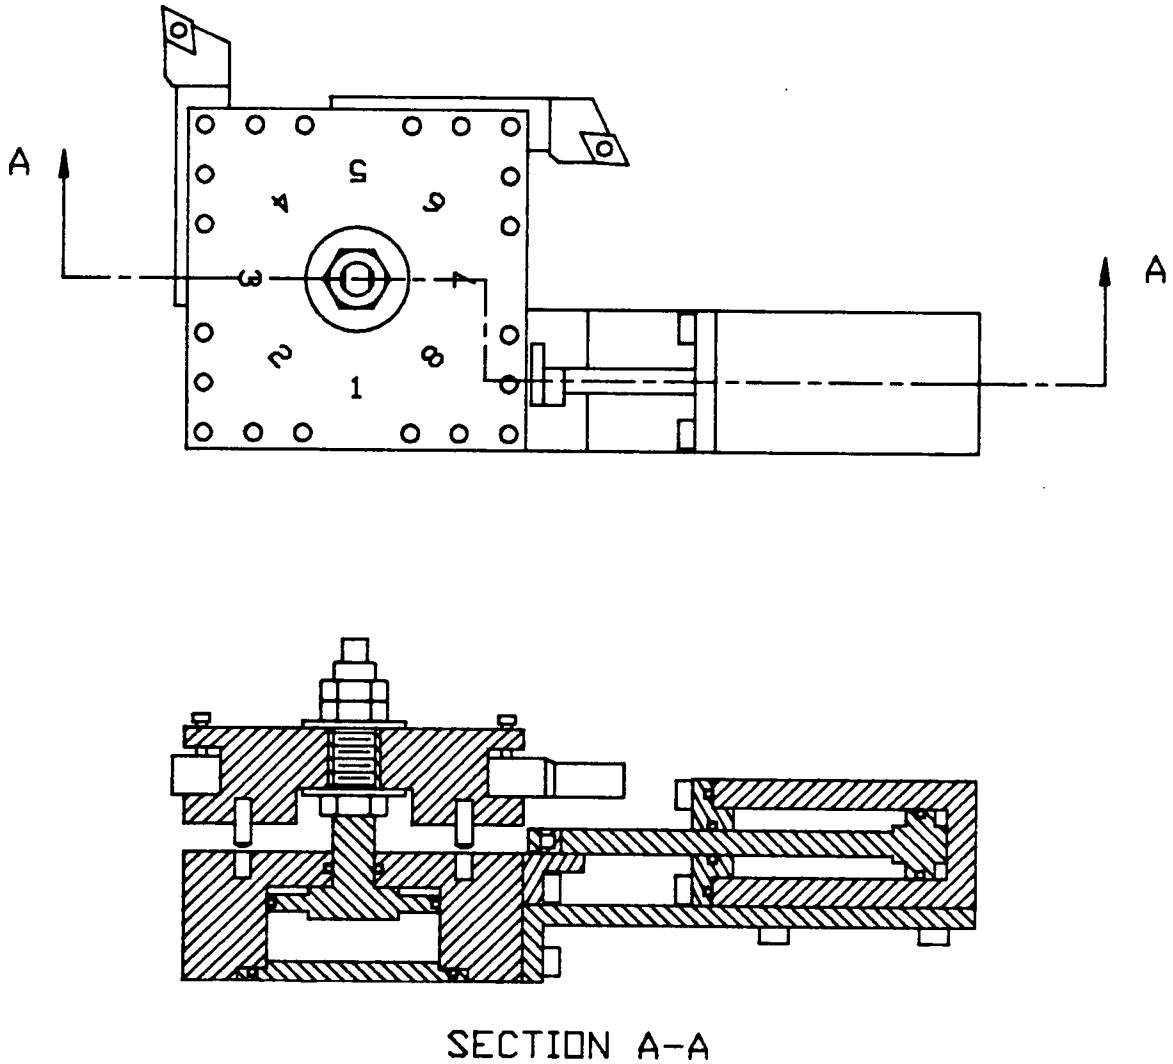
Pneumatic Tool Changer Assembly Drawing
